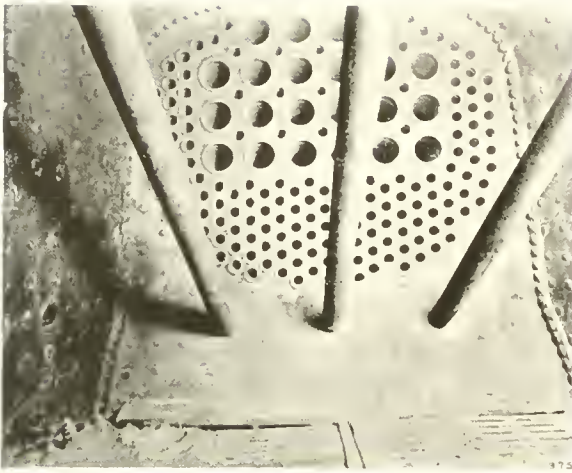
Tubes welded into the tube sheet of the locomotive boiler. This is an exceptionally good example of this kind of work.
